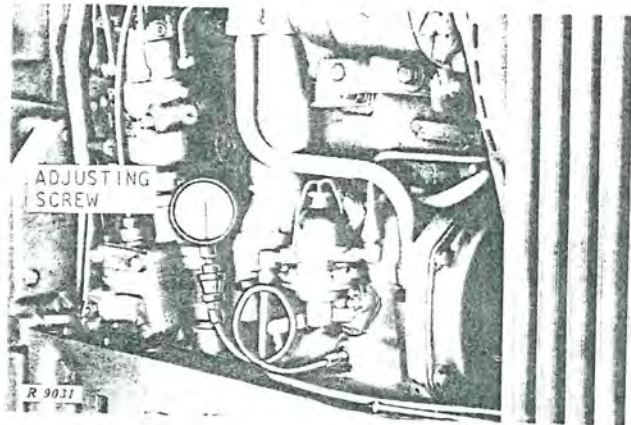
Checking and Adjusting Oil Pressure (4270D)
